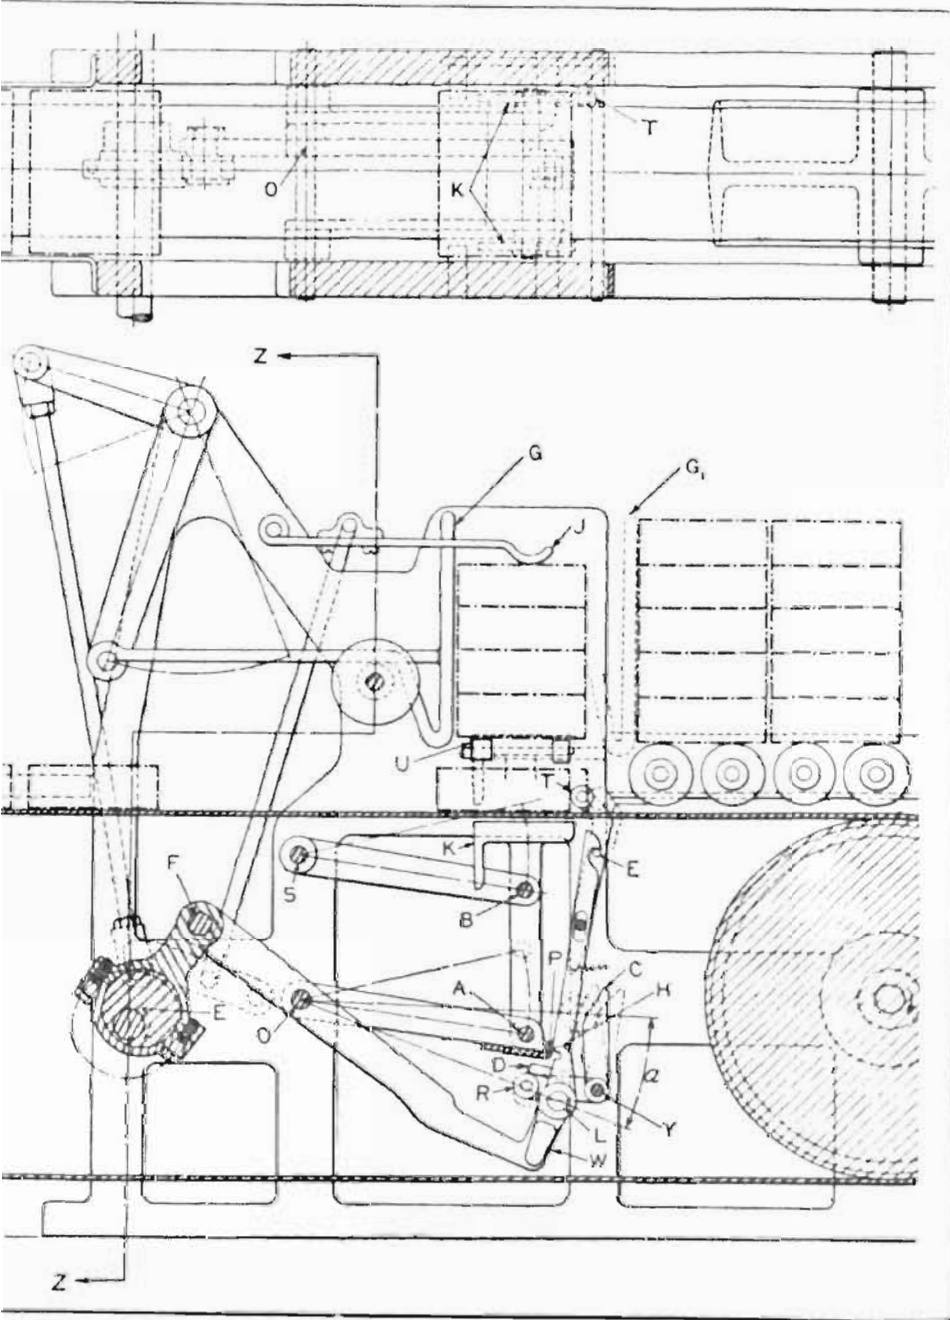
Stacking Mechanism at End of Conveyor Belt which Raises Pieces from Belt, Arranges them in Stacks, and Transfers the Stacks to a Roller Carrier
